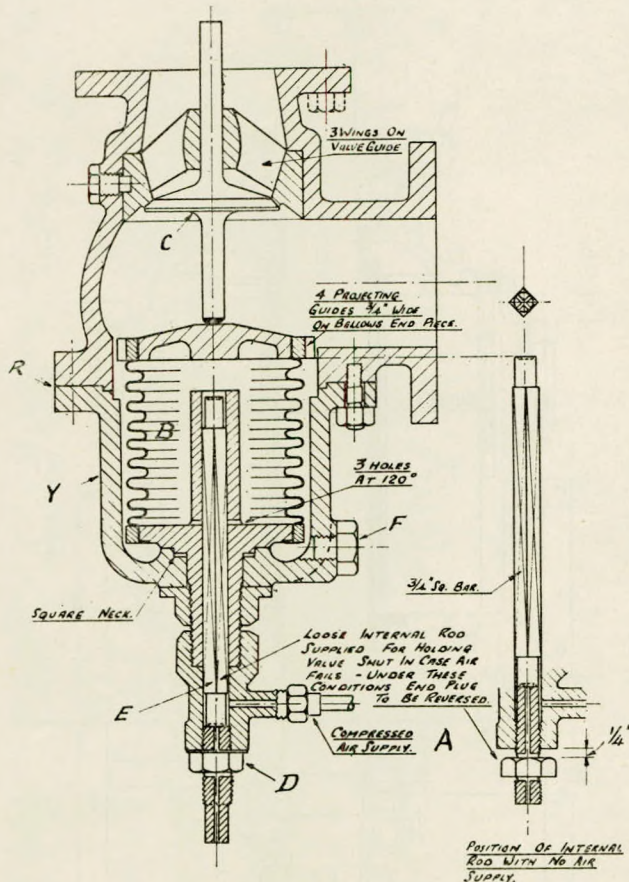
5-in. bore "Lightning" relief valve for oil cargo pumps
